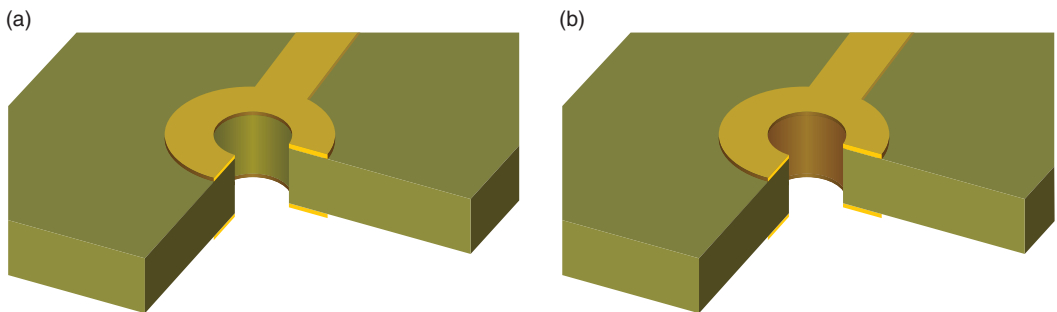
Holes are drilled into the board and then copper plated. (a) A nonplated through-hole. (b) A plated through-hole.
